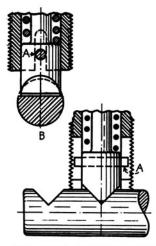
The round plunger is flat milled to a 90-deg. included angle and prevented from turning by pin A engaging milled slots in the threaded plug. In the end view shown at B, it can be seen that, if the spring tension is to be adjusted, at least a half turn must be given so that the flattened point will coincide with the slot in the rod.
